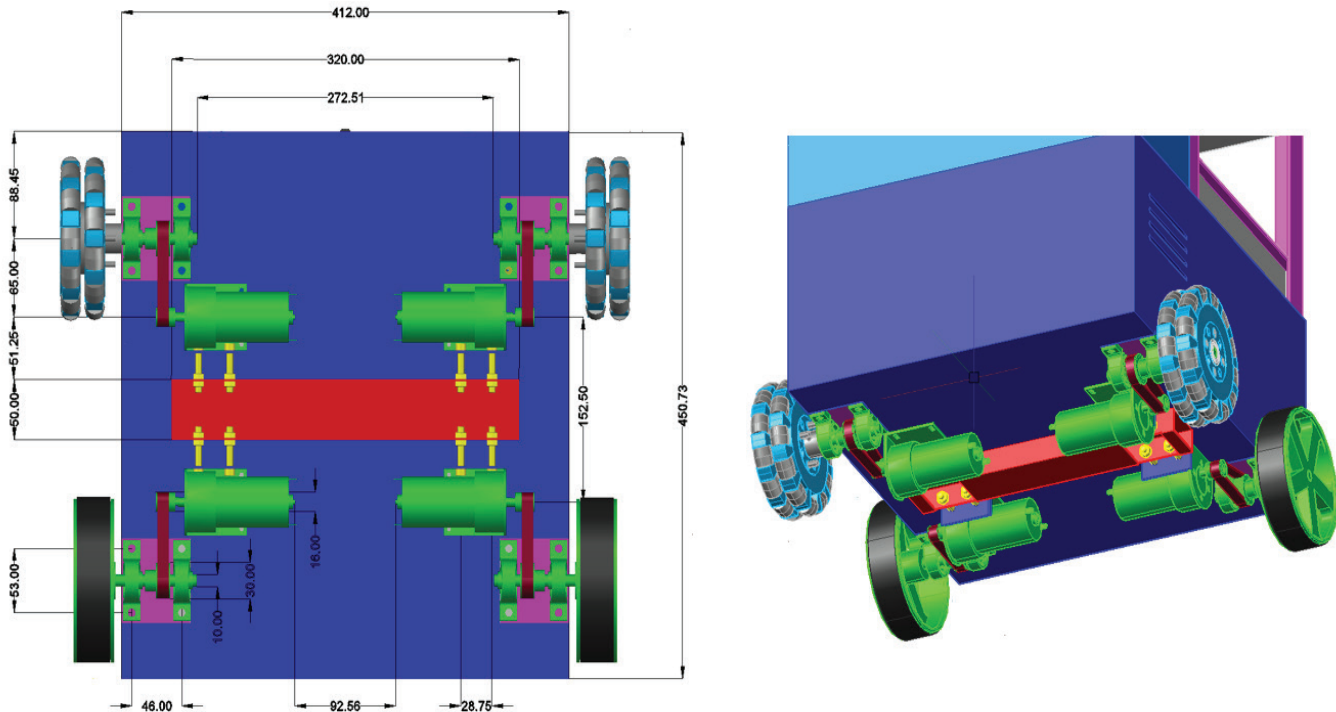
Movement and steering unit appearance and dimensions. The measurement unit is millimetre.
